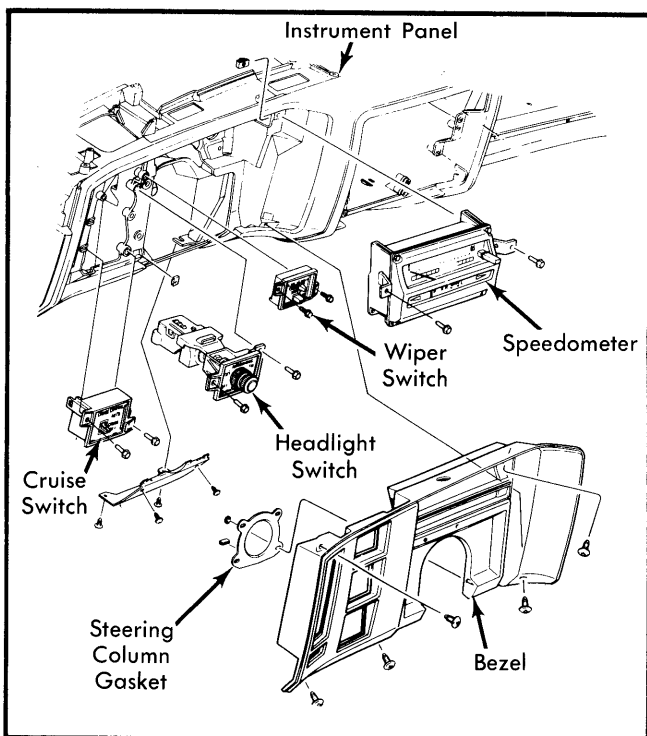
Speedometer Cluster Removal (Fleetwood and DeVille)
